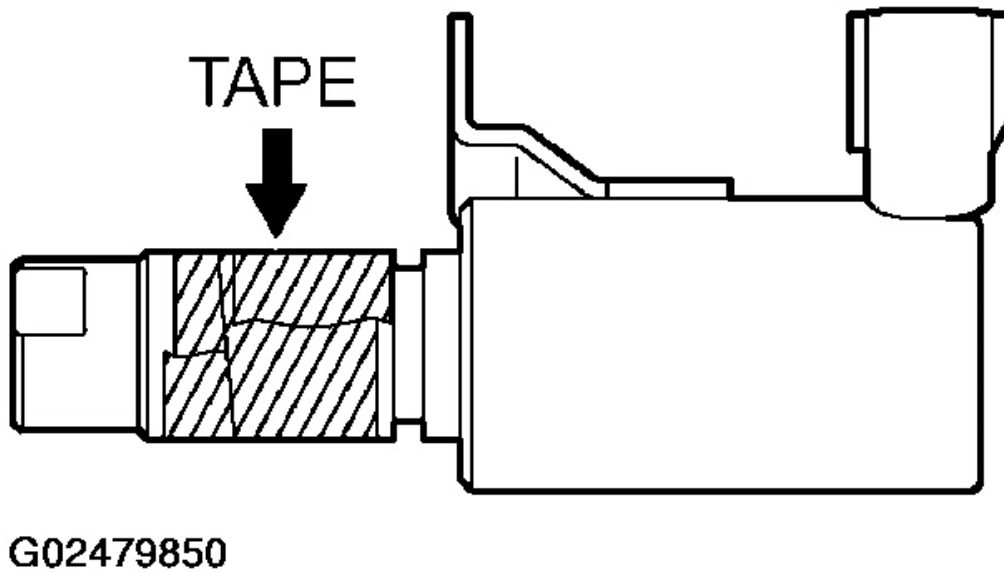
Winding Tape With Soft Adhesion Around Oil Passages Cut-Out Area Of Engine Oil Control Valve
